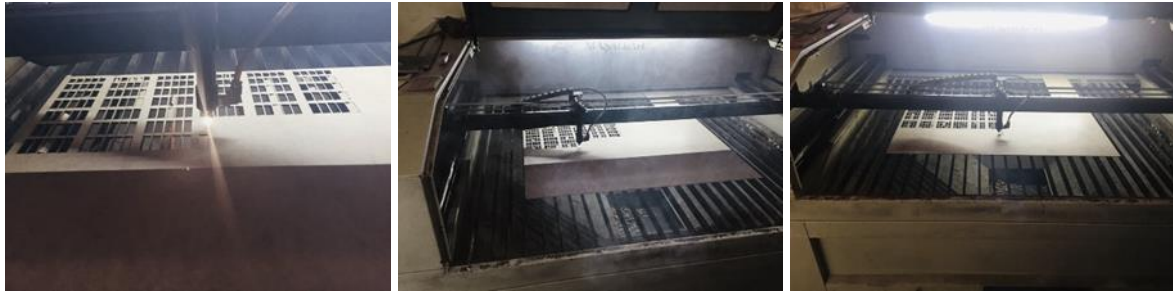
The corbel dome modal brick manufacturing process with CNC laser cutting.
